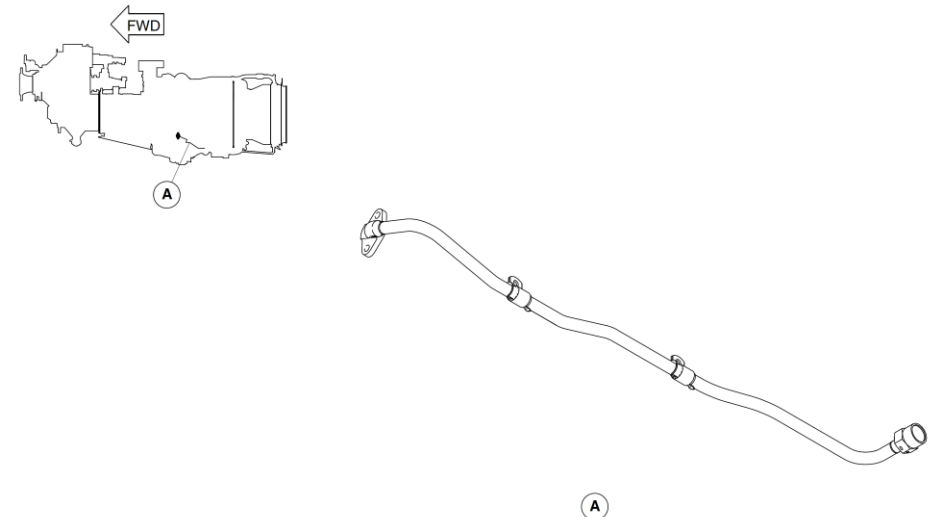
P3 Air Separator to P2.2 Bleed Valve Air Tube
